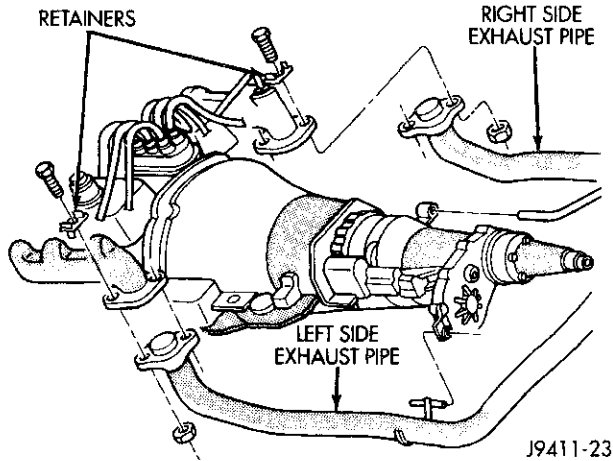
Exhaust Pipe—5.9L Heavy Duty and 8.0L—Typical
